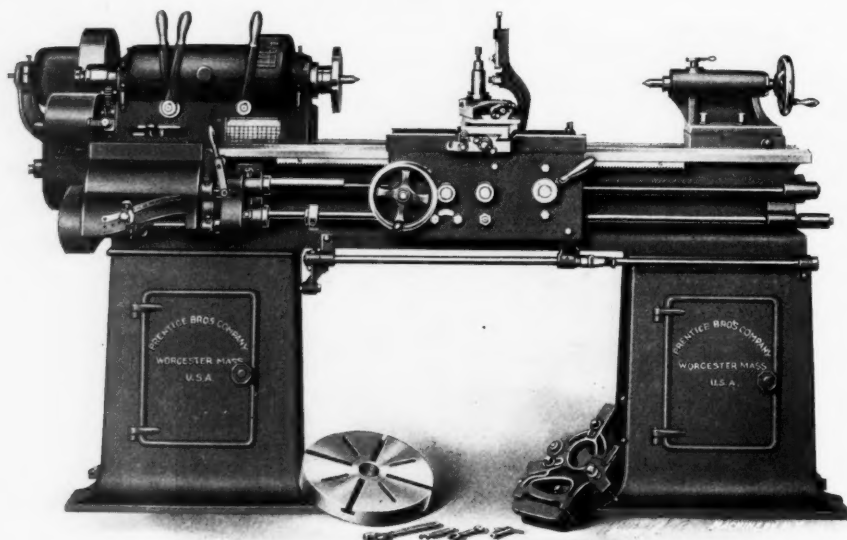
Geared-head Prentice Lathe with Reversing Mechanism incorporated
